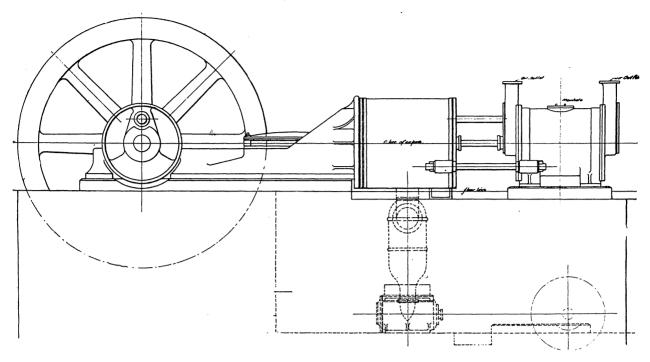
Side Elevation Cross Compound Bessemer Blowing Engine.
